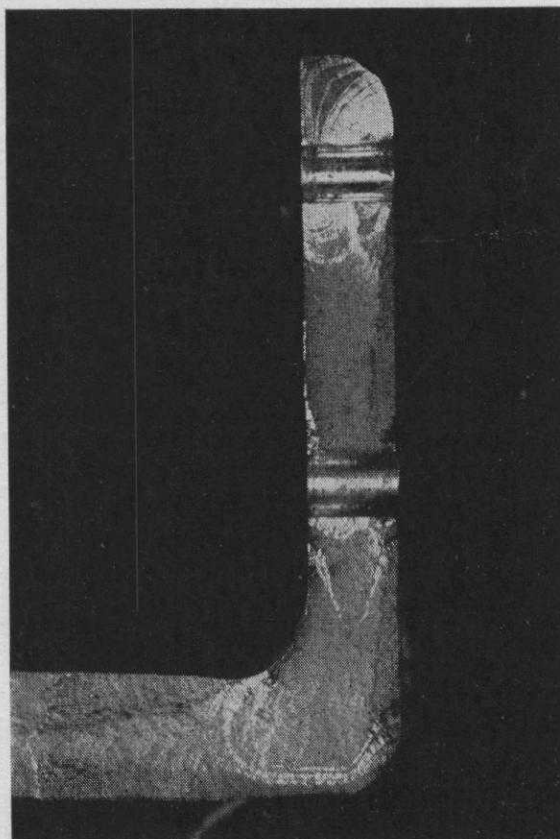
Area affected by fatigue cracking in channel section, showing zones of alternate fatigue and rapid crack propagation.
